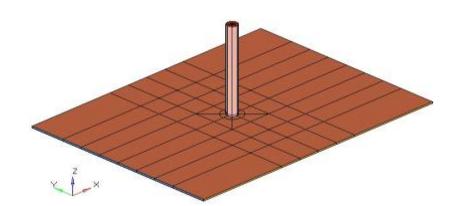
Isometric View of Finite Element Model of Friction Stir Welding Process Showing Tool and Workpiece
